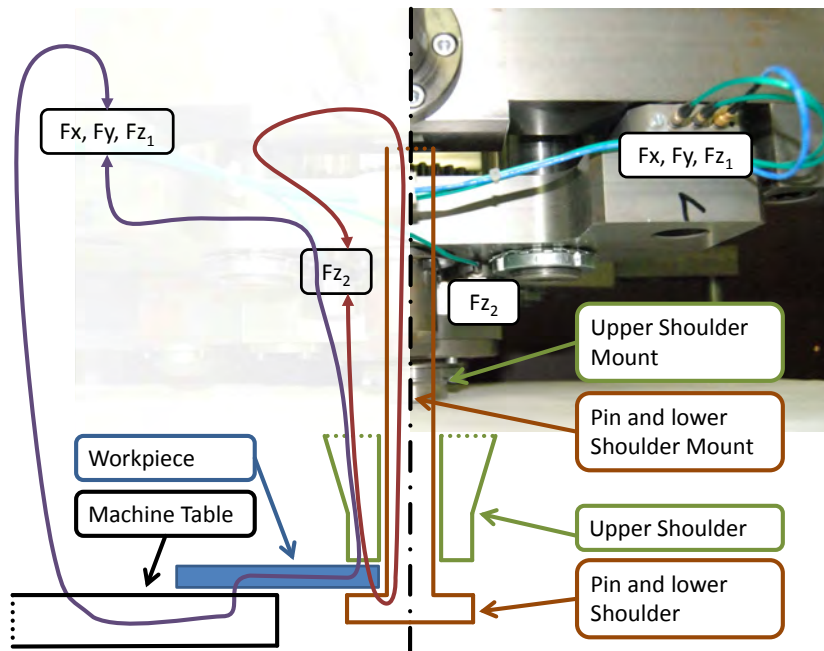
Force measurement in the FlexiStir BT-FSW welding head
